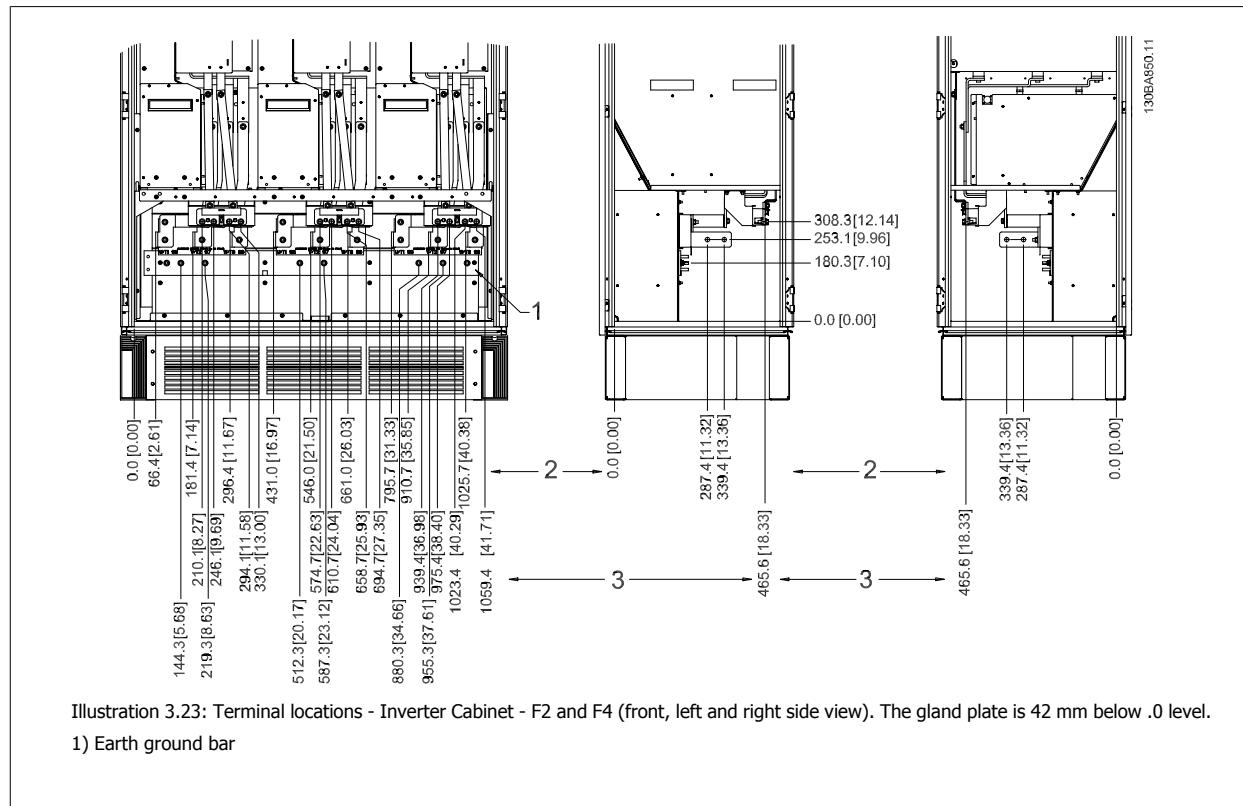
Terminal locations - Inverter Cabinet - F2 and F4 (front, left and right side view). The gland plate is 42 mm below .0 level.
